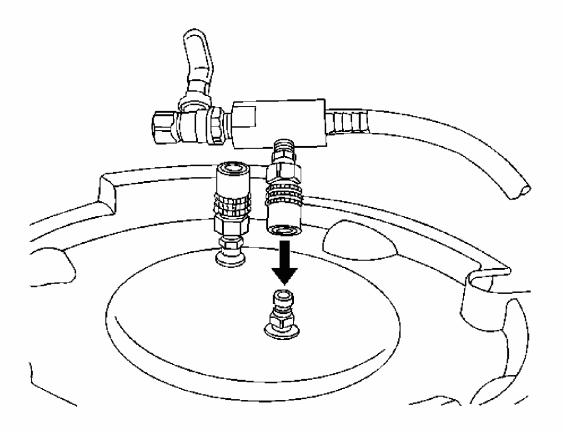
Attaching Venturi Assembly To Vacuum Tank Courtesy of GENERAL MOTORS CORP.
